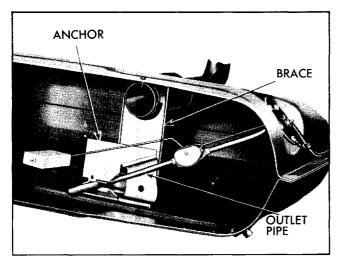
Fuel Gauge Tank Unit Installed in Tank
